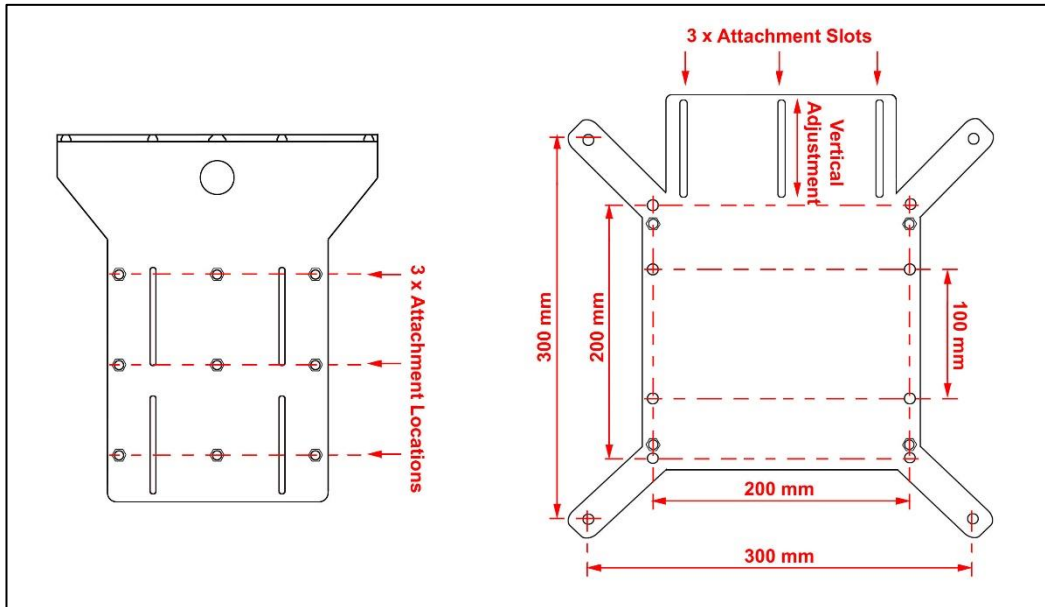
MedView Mounting Bracket and Adaptor Plate Layouts
